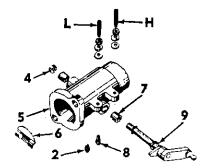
Exploded view of the venturi and component parts used on early B-275 tractors fitted with injection pump having pneumatic governor.
